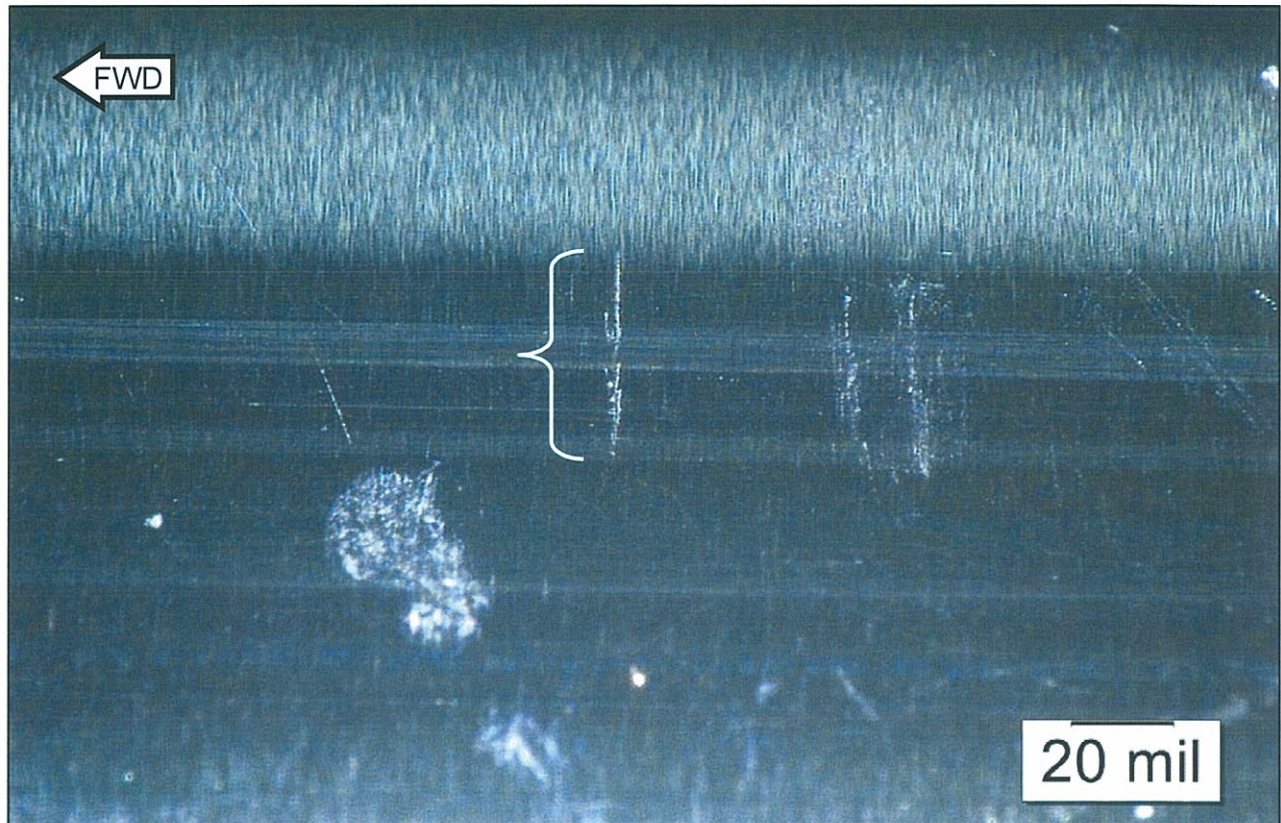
View of the right inboard flap actuator piston shaft surface near the aft end of the piston. An unlabeled bracket indicates a circumferential mark observed on the surface.
